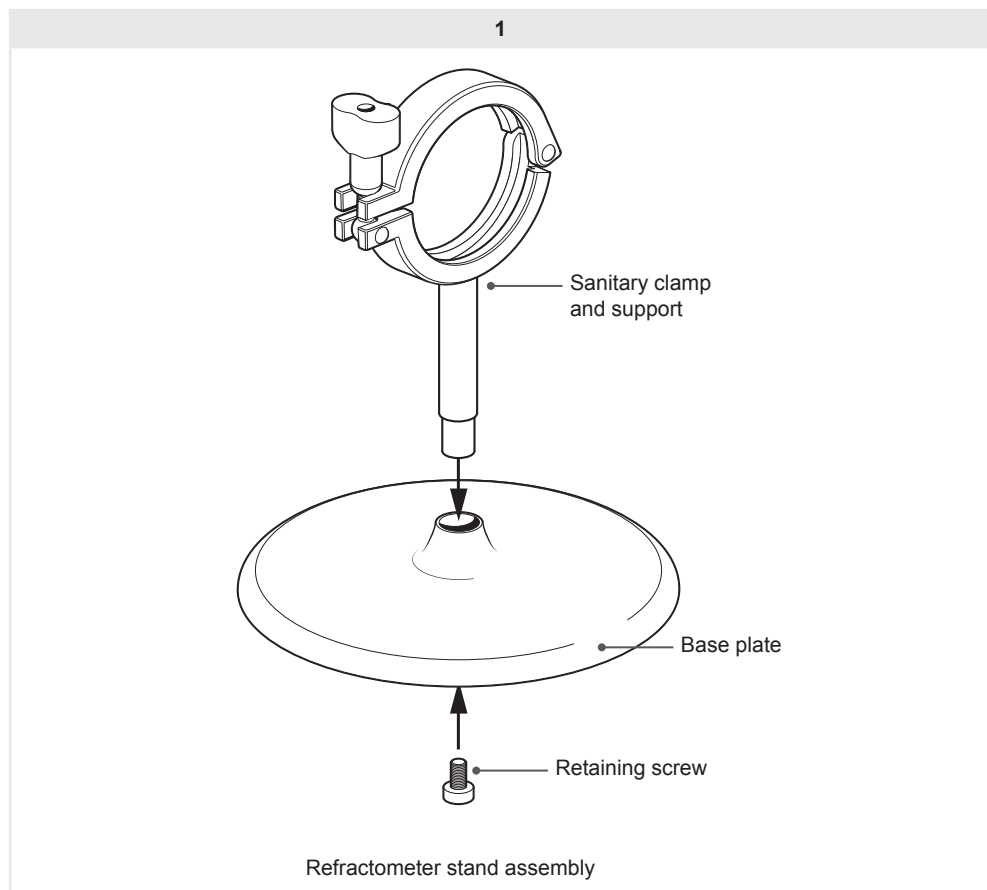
Refractometer stand assembly: Attaching the clamp and support rod to the base plate.
